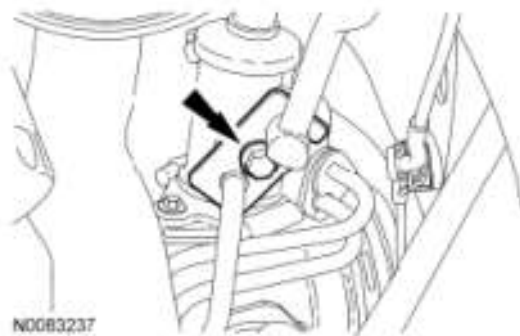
Locating Power Steering Fluid Tubes And Bolt
